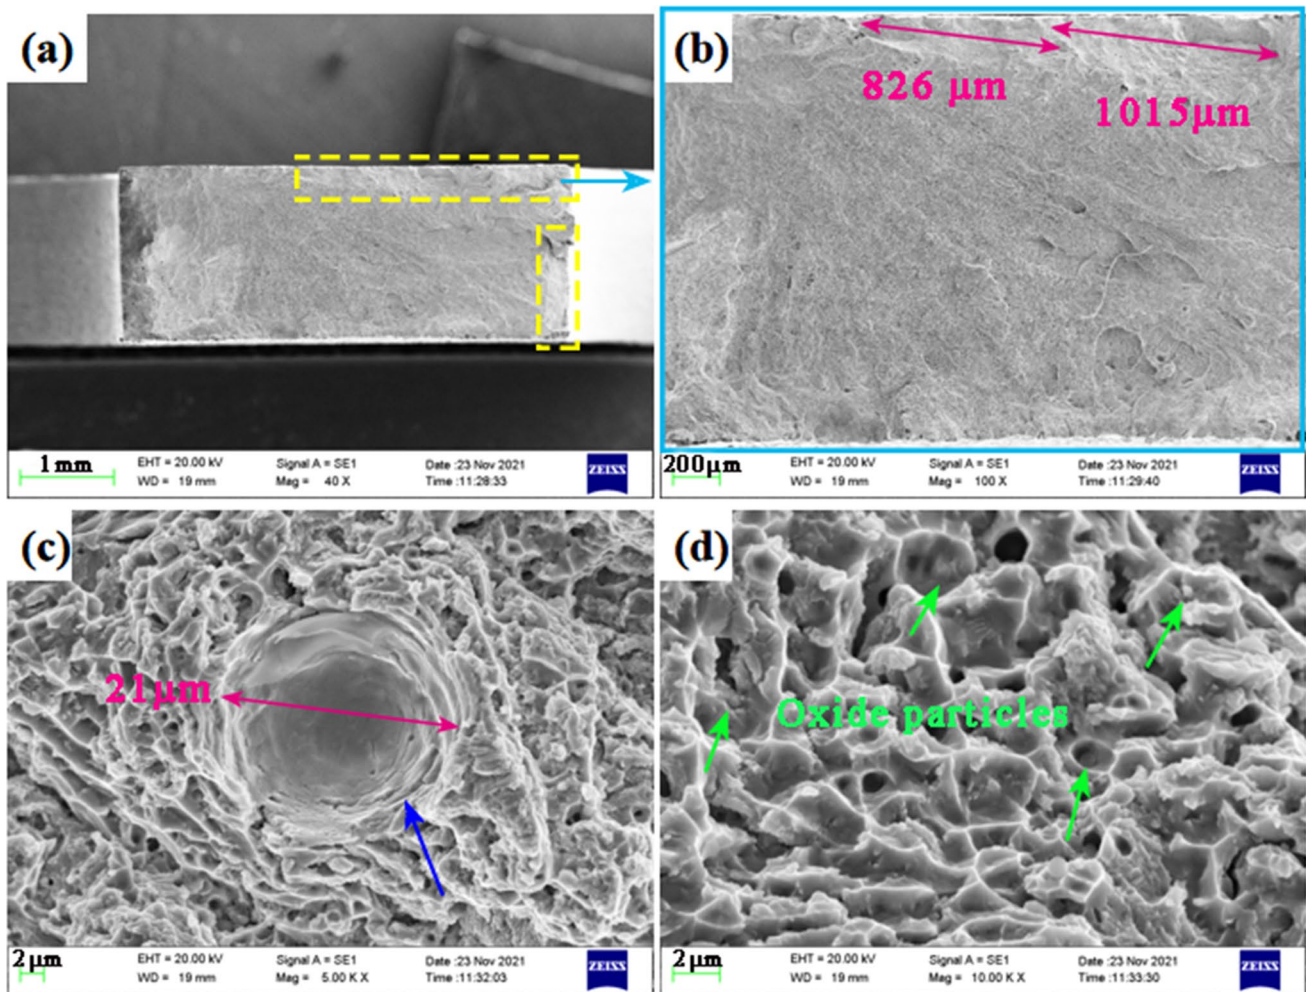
Represented fracture surface of sample 'S1-1' ( $\epsilon_f=14.2\%$ ). a Macroscopic fracture morphology, b, c are enlarged images showing the pores and lack of fusion defects, d a high magnified image revealing the dimple fracture and oxide particles
